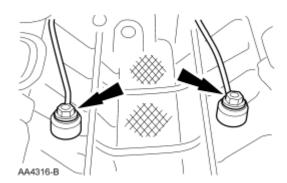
Knock Sensor Courtesy of FORD MOTOR CO.
